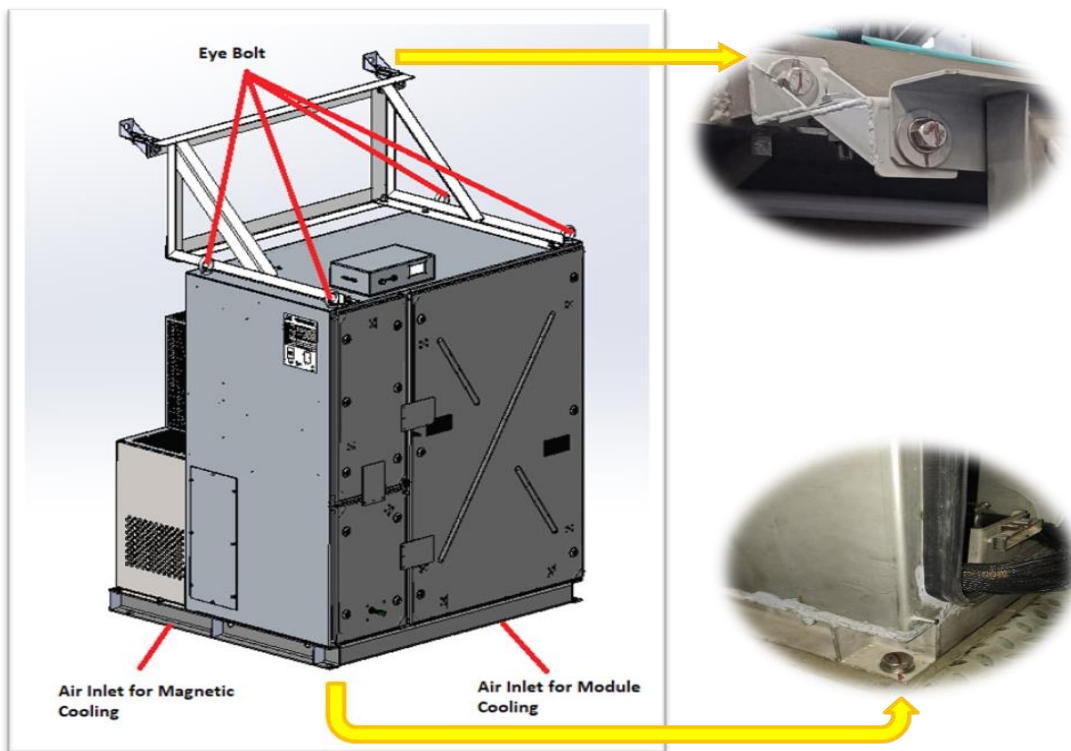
Base Bolt Mounting & Top Angle Brackets Mounting of Box1
